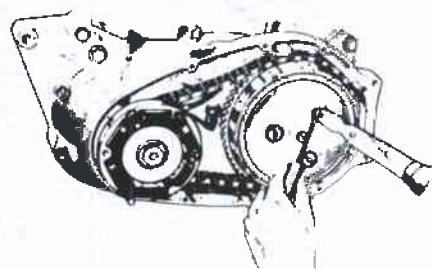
Clutch spring tension can be adjusted as shown after removing the primary chain cover. Refer to text.
